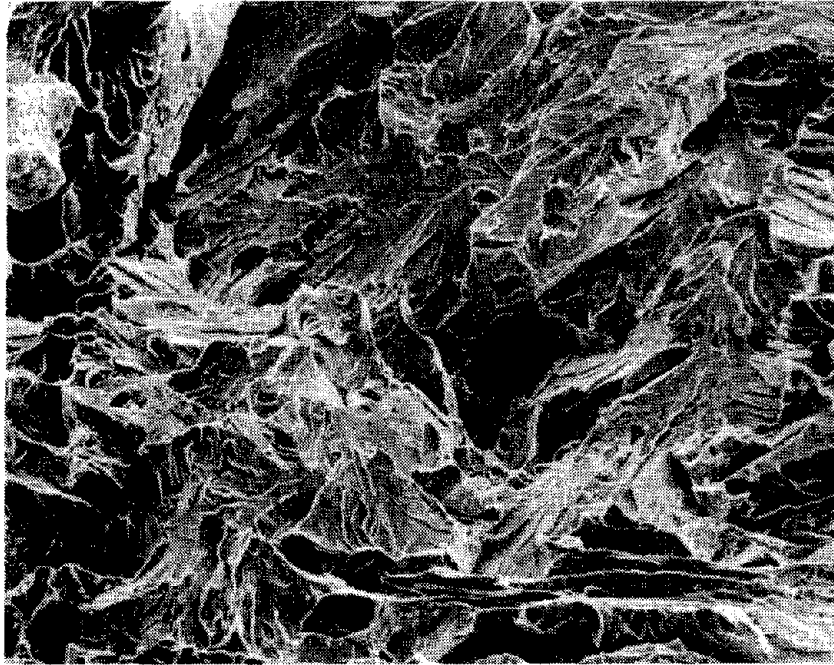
FRACTURES OF IMPACT SPECIMENS FROM THE WELD METAL.
